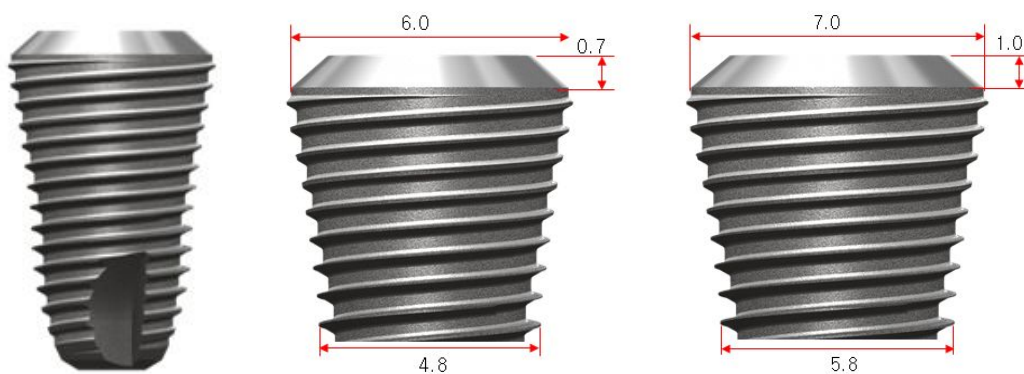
Root-shaped Superline implant. The diameter of fixture is 4.8~5.8mm and that of shoulder is 6.0~7.0mm.
